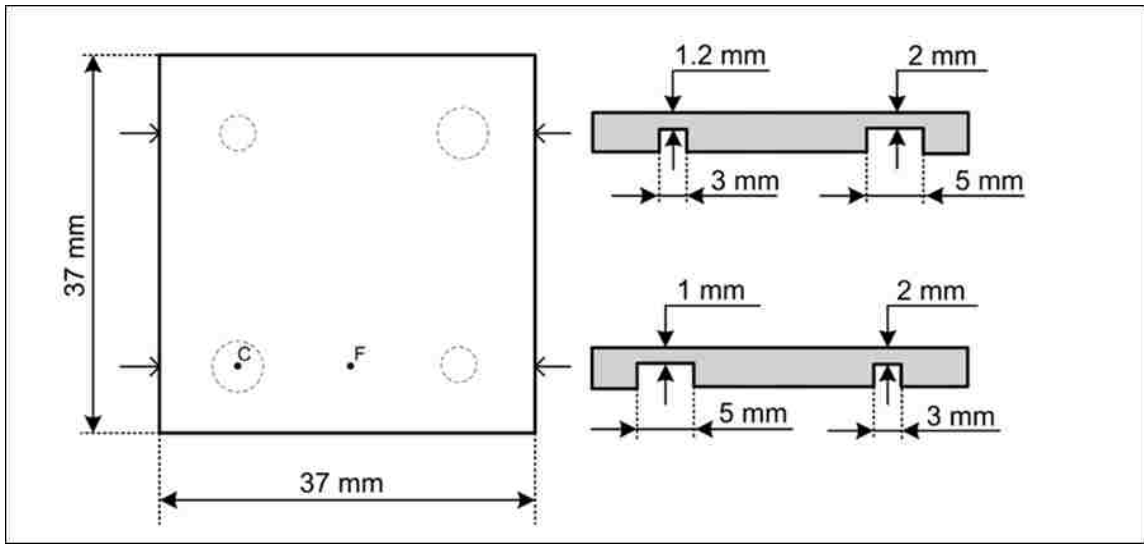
Sketch of the inspected sample with 4 flat bottom holes [109]
